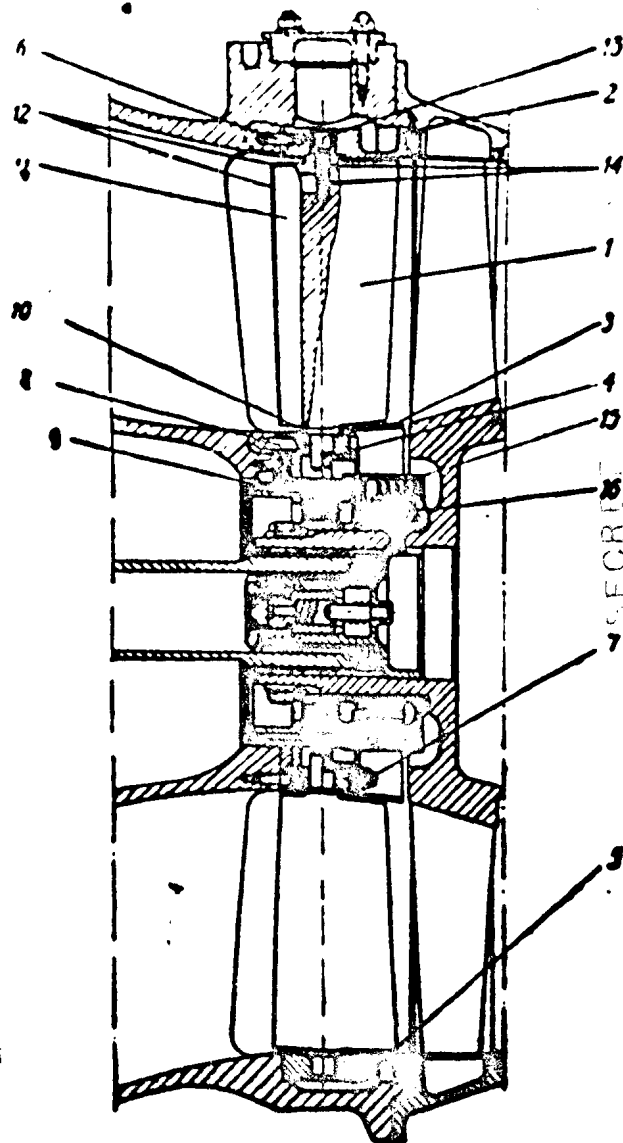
Compressor Section Thru Guide Vane Assembly.
